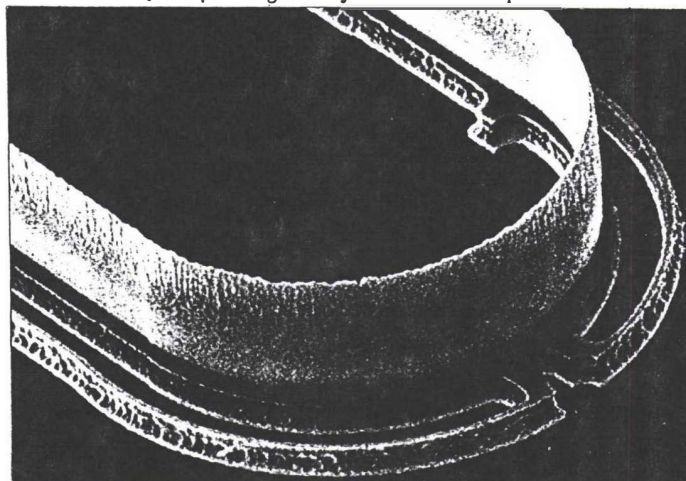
Bottom view of semicircular molded flexure with full Wheatstone bridge strain gage to sense tweezer tip position
